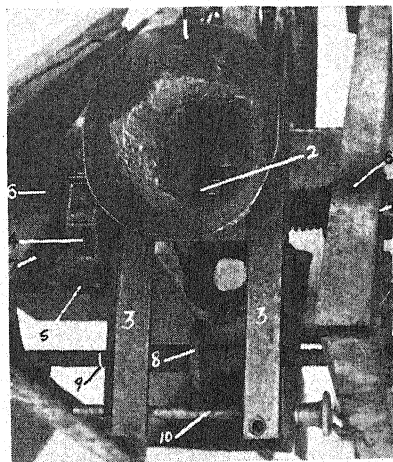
Fluted feed showing method of adjusting and cleaning. (1) Feed cup made of heavy gauge sheet metal; (2) feed roll; (3) $\frac{3}{4}$ -inch angle iron attached to sides of fluted feed assembly with small stove bolts; (4) 11-tooth sprocket; (5) No. 25 drive chain (6-tooth sprocket on drive wheel); (6) oil holes for bearings (7); (8) knob for adjusting rate of seeding; (9) slot marker on adjusting rod; (10) removable pin to enable operator to tilt fluted feed forward for cleaning.
